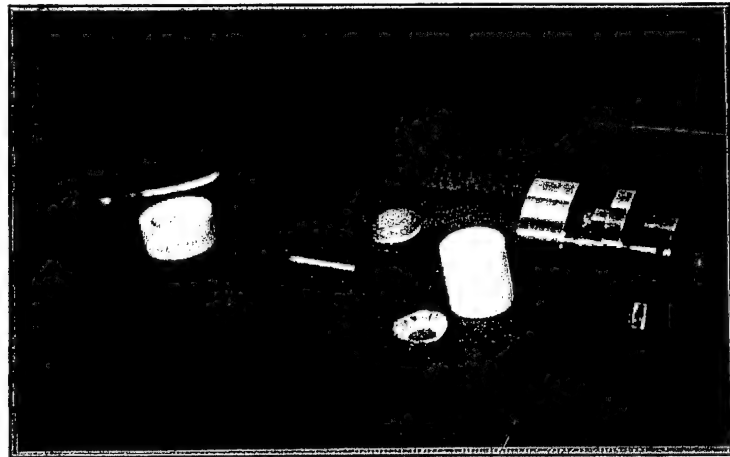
shows the strain-relief design. The ring around the sensor has a drilled-through hole (without threads) that the bolt fits through. The bolt screws into a clamping plate that contains a groove to position the electrical wire. The screw and clamp plate can be disposed of if the high temperature environment causes them to be damaged during removal while the ring around the sensor remains undamaged. In the second generation prototype sensor the ring was machined as part of the sensor instead of fitting it to the sensor as a separate assembly step.
